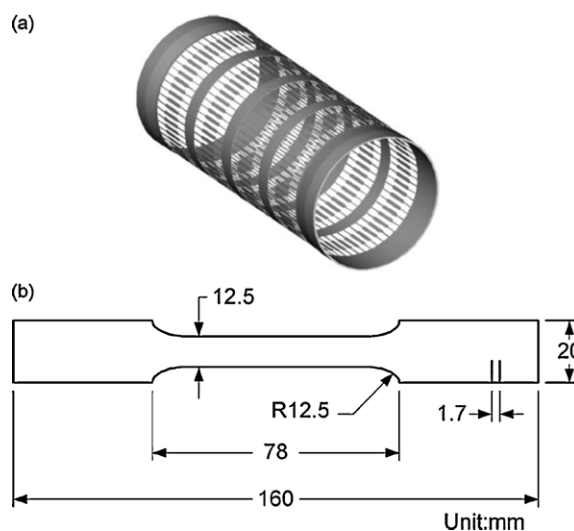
Tensile specimen of EB welded tube. (a) Layout for procurement of tensile specimens and (b) dimensions of tensile specimen prepared in compliance with ASTM E370.
